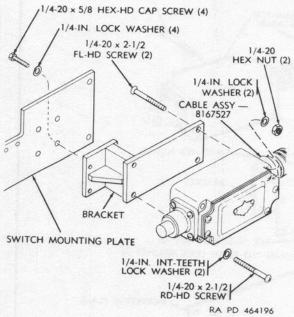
Missile-away switch assembly (1081 through 1089)—disassembly and assembly.
